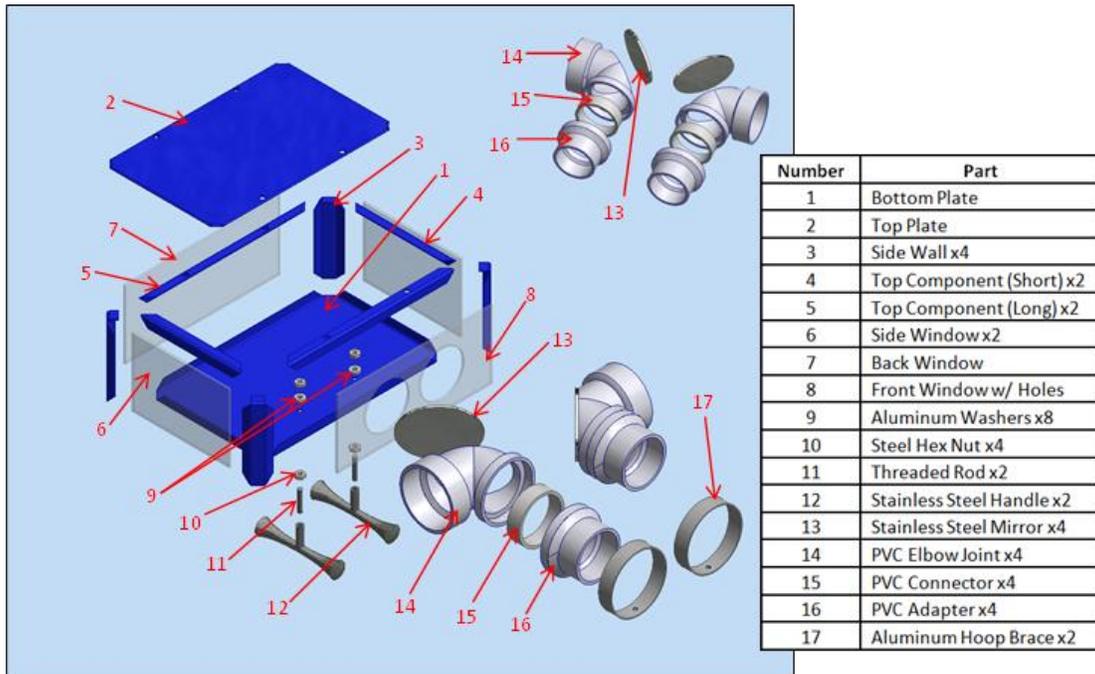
Exploded assembly drawing of the Aquarium model. Pieces are attached via welds of epoxy as stated in the How To Build Recipe
